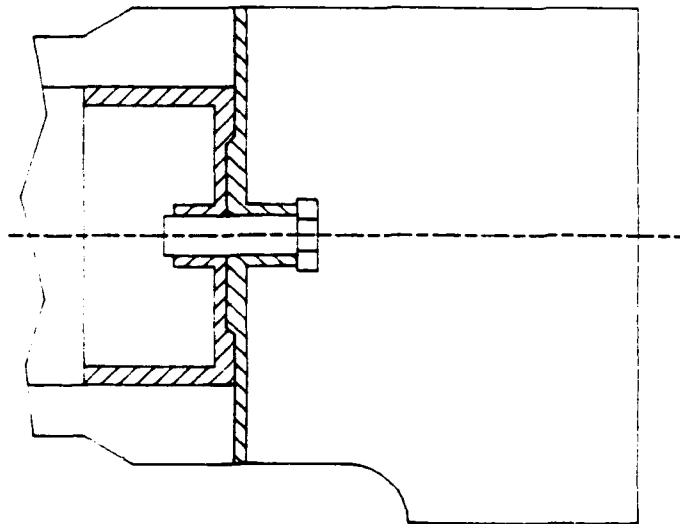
Missile/Rear Slipper Interface - Explosive Bolt
